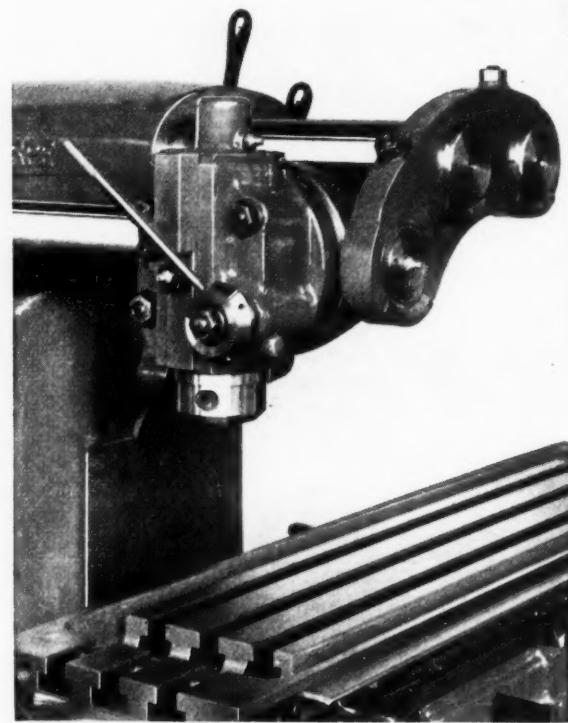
Close-up View of Extra Milling Head Developed for "Omniversal"
